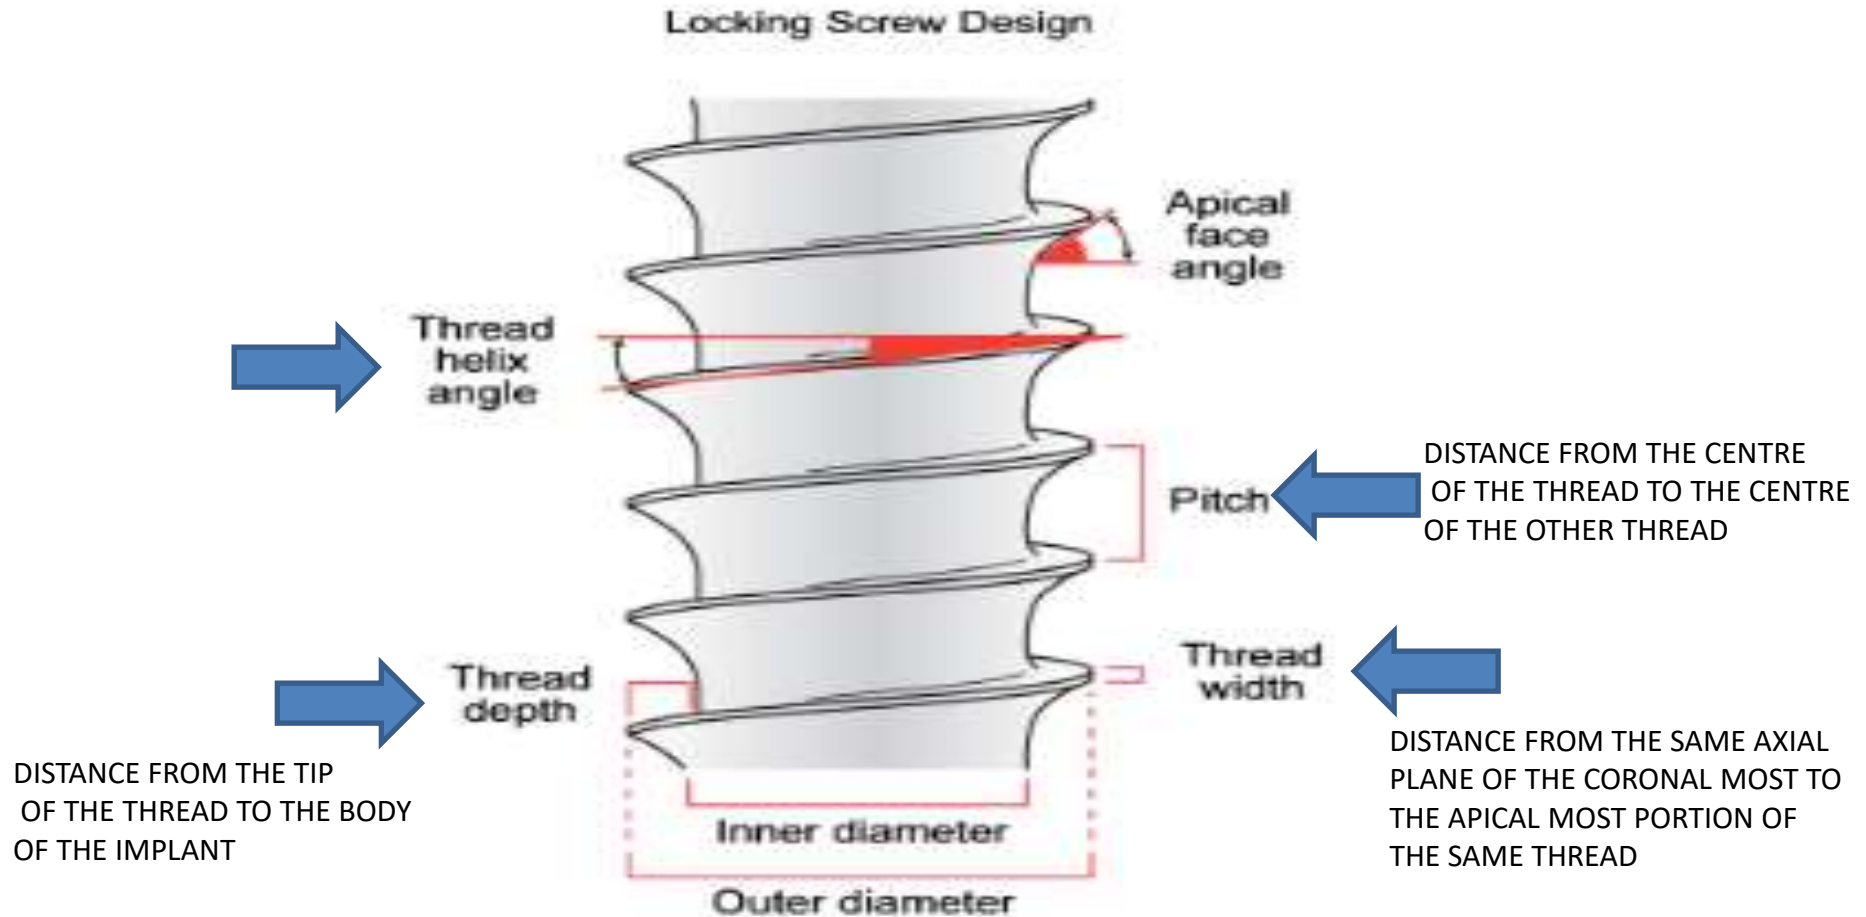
Basic implant macrodesign features: face angle, thread helix, thread pitch, thread depth, thread width and inner and outer implant diameter.
